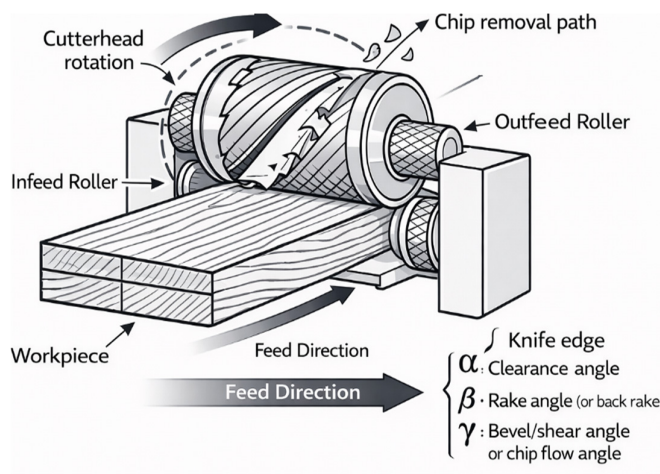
Schematic diagram of the planer machine used to achieve uniform thickness of wood strips or veneers before assembly in bamboo plywood production.
